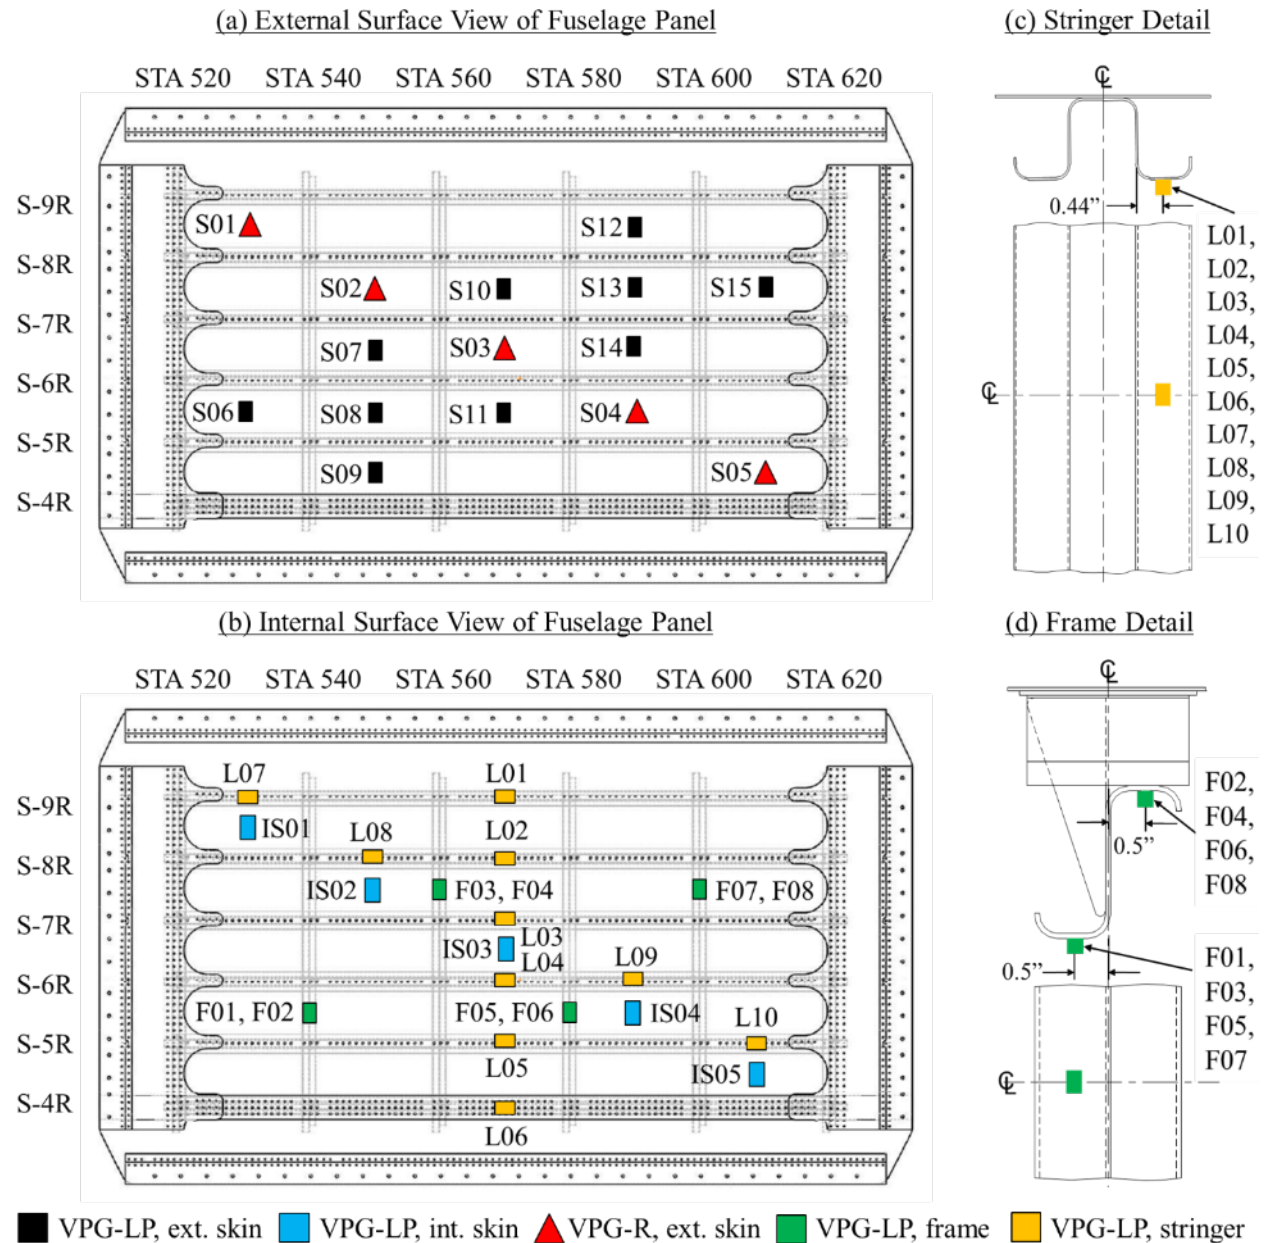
Strain gauges installed before cutting notches in the panel: (a) external fuselage panel surface, (b) internal fuselage panel surface, (c) stringer detail, and (d) frame detail
